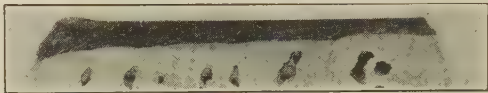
LONGITUDINAL CROSS-SECTION OF A CHROMIUM STEEL METALLIC ARC WELD DEPOSIT USED TO STUDY BLOW-HOLES IN WELDS
